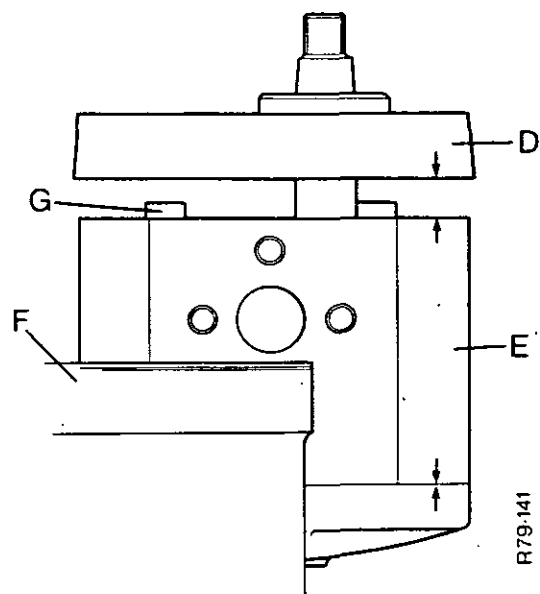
REMOVAL OF THE PUMP FLANGE
